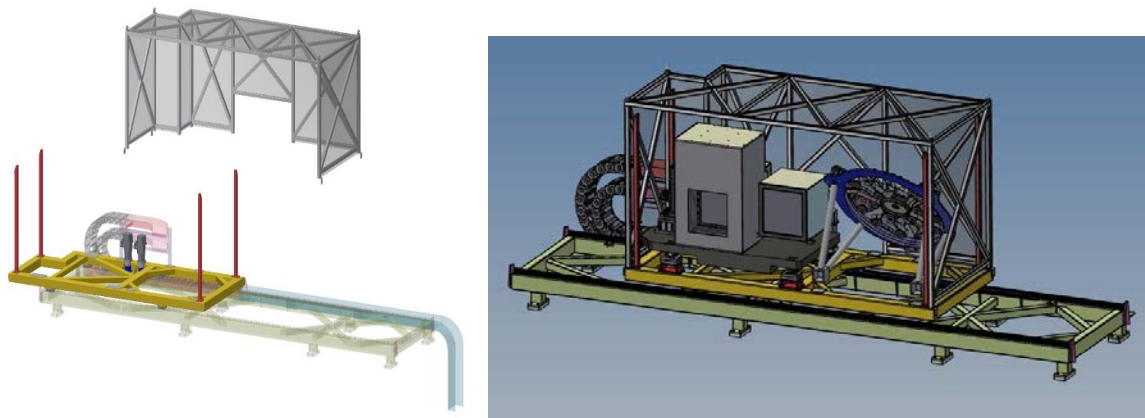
the CU selector with the enclosure removed for the installation of the MCA dummy and of the FMCU (left end side), and the CU selector fully assembled (right end side)
